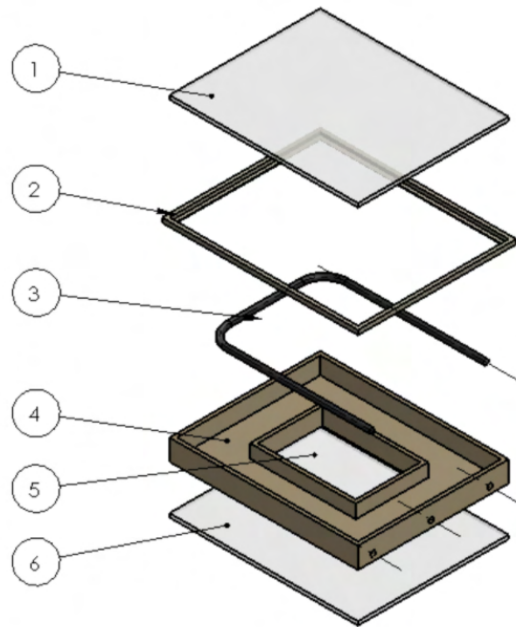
Exploded view of the Solidworks drawing showing the part names and descriptions.
